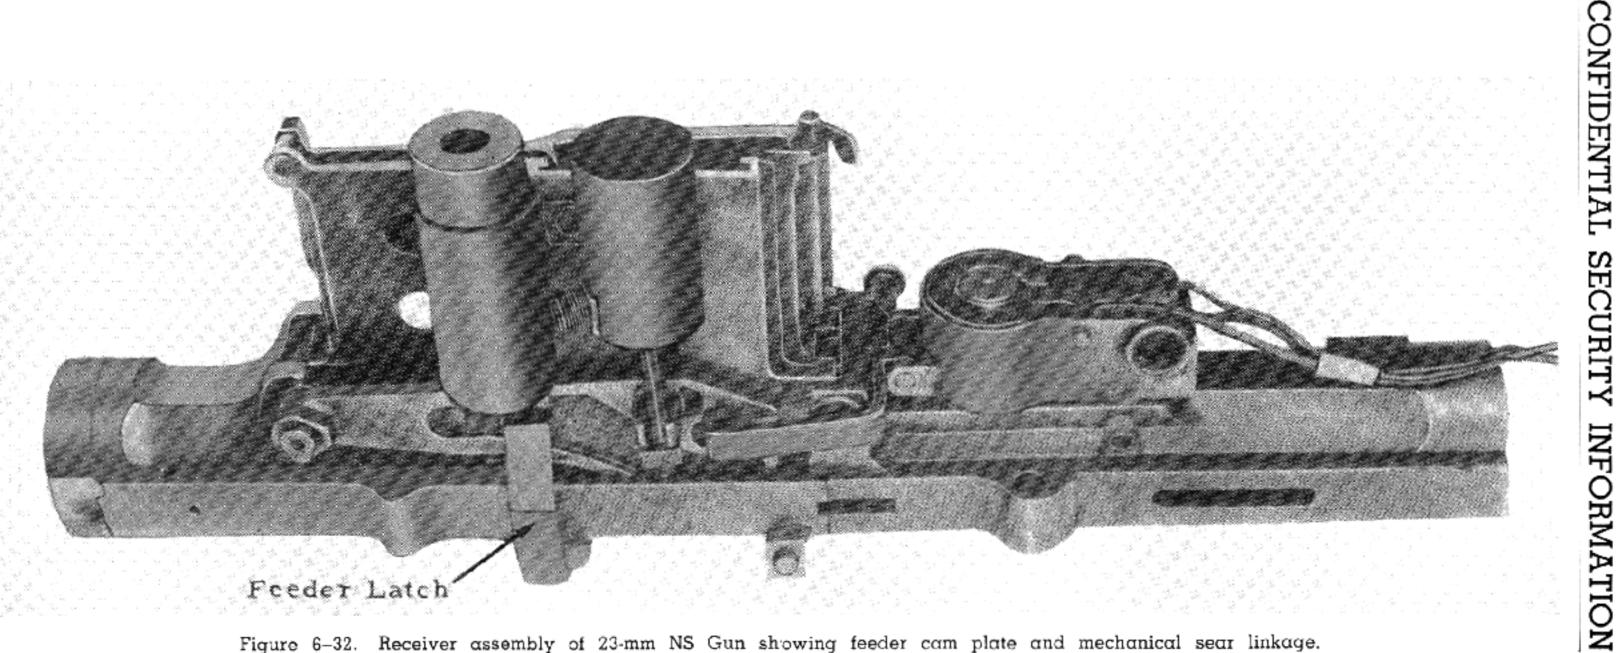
Receiver assembly of 23-mm NS Gun showing feeder cam plate and mechanical sear linkage.
